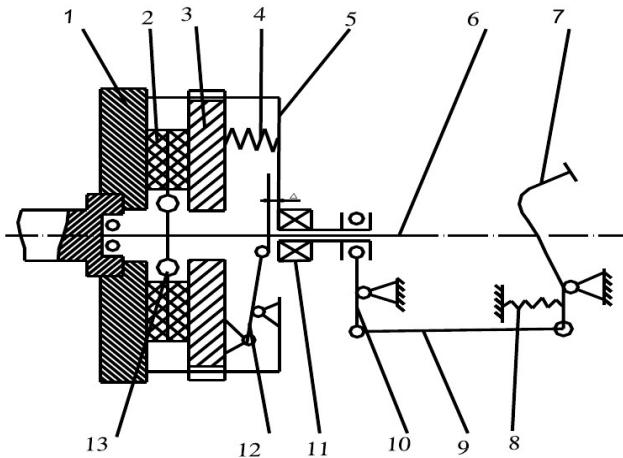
Dry-friction clutch with a cylindrically-arranged spring-loaded passive disc
